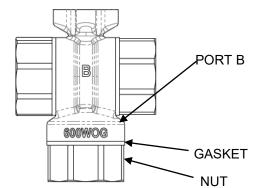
3-Way Control Valve NPT Connection Components
